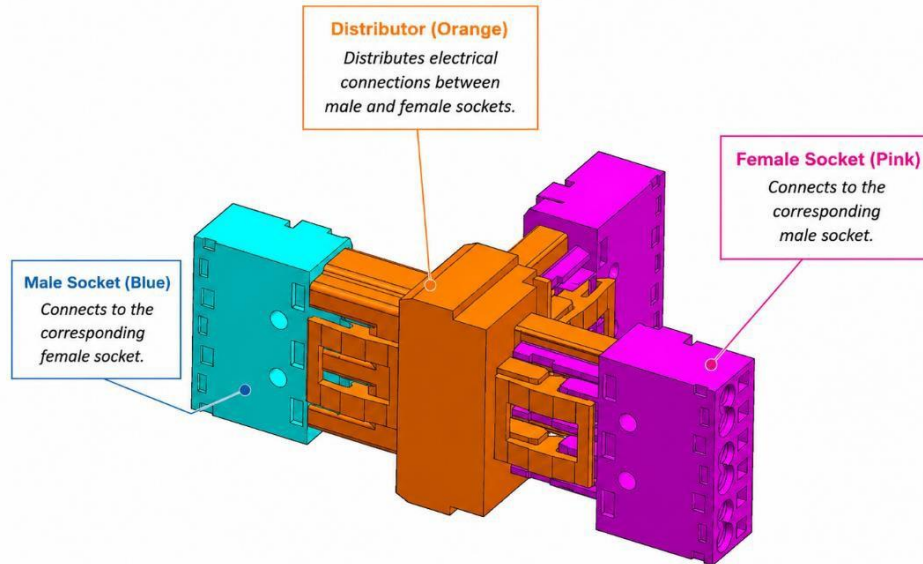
Wago model re-pin de-pin type assembly of connectors
